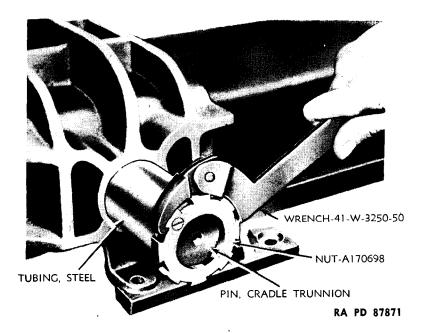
Removing Cradle Trunnion Pin From Cradle
